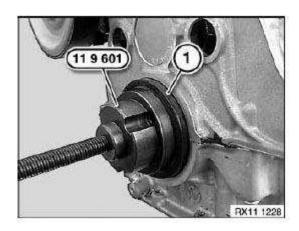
Special Tool (11 9 601) Courtesy of BMW OF NORTH AMERICA, INC.
